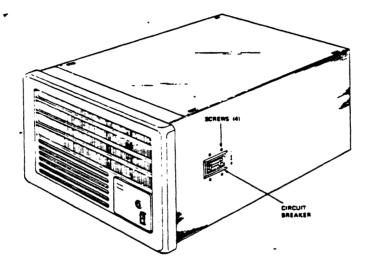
BOX CIRCUIT BREAKER REMOVAL
